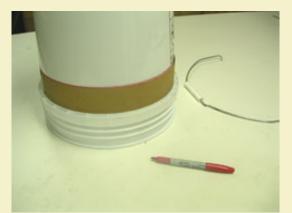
Using a band of paper as a guide when drawing the cutoff line.
